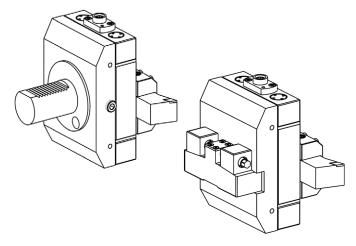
Dynamometer Type 9129AA with machine adapter Type 9129AB40 (left) and Type 9129AD25 (right) and tool holder Type 9129AE25
